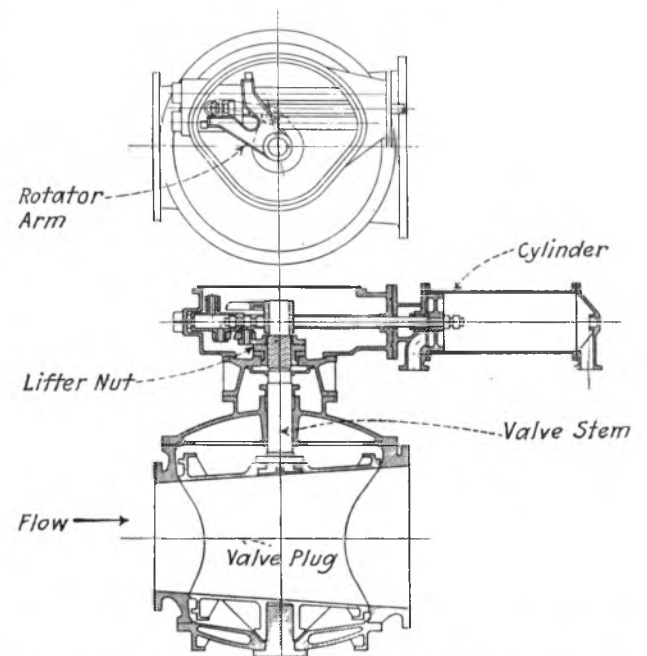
CROSS SECTION OF 40¹/₂-IN. BY 53⁷/₈-IN. RESEATING HYDRAULIC CONE VALVE; PELTON WATER WHEEL COMPANY
